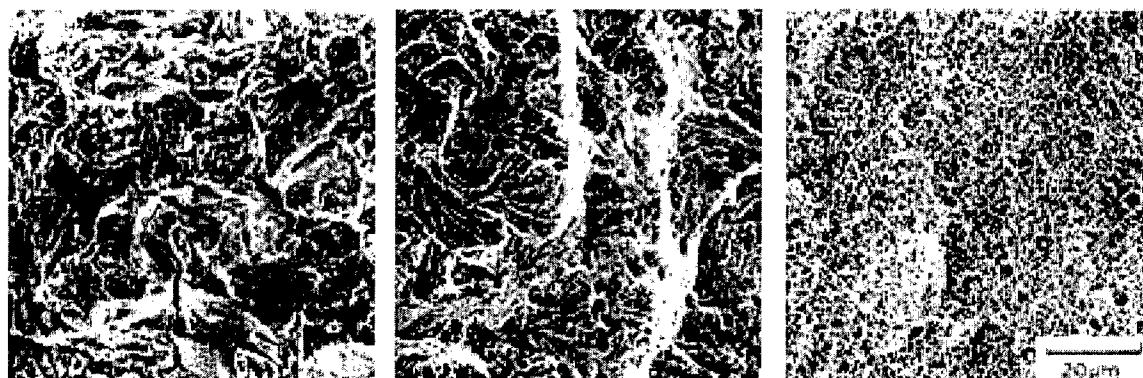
Typical fractographic modes of HAC, (a) intergranular fracture (IG), (b) quasicleavage fracture (QC), and (c) microvoid coalescence (MVC) [127].
